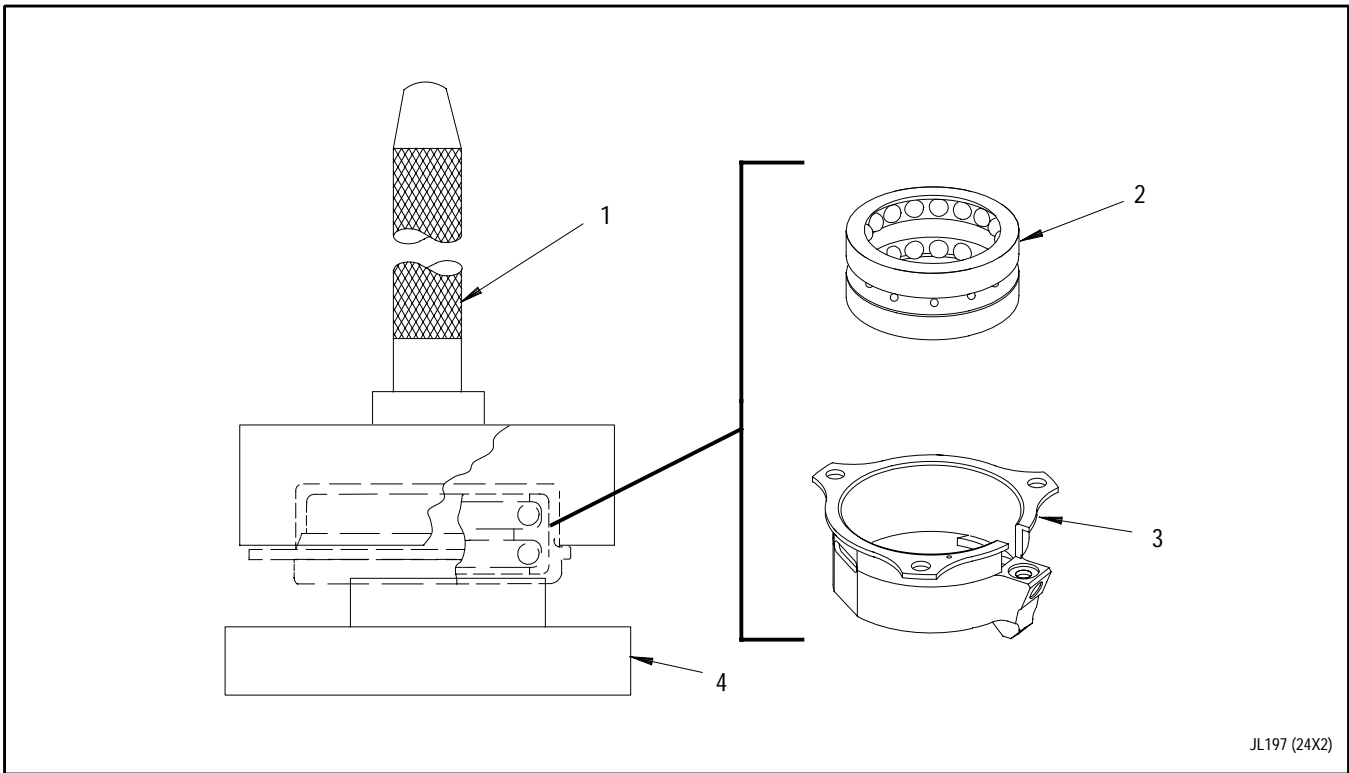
Bearing Assembly (Spur Bevel Gearshaft) - Disassembly
